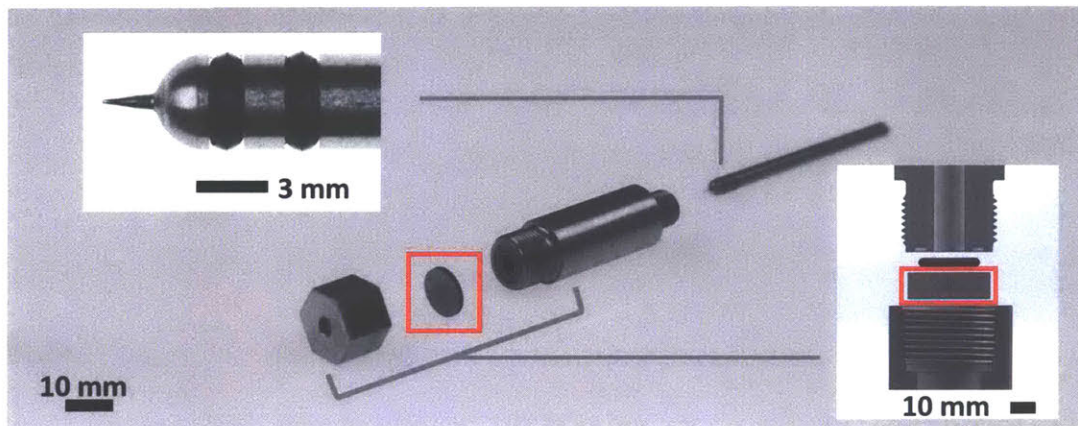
The multi-piece ampoule. A picture showing the four parts (left to right): head, nozzle insert (boxed in red), body, and piston with a close-up of its tip (left inset). A cross section (right inset) shows the ampoule body seats an O-ring in a circular groove, a nozzle insert (boxed in red) that is readily exchanged, and a head that attaches to the threads of the ampoule body and compresses the O-ring to form the fluidic seal. Figures adopted from [4].
